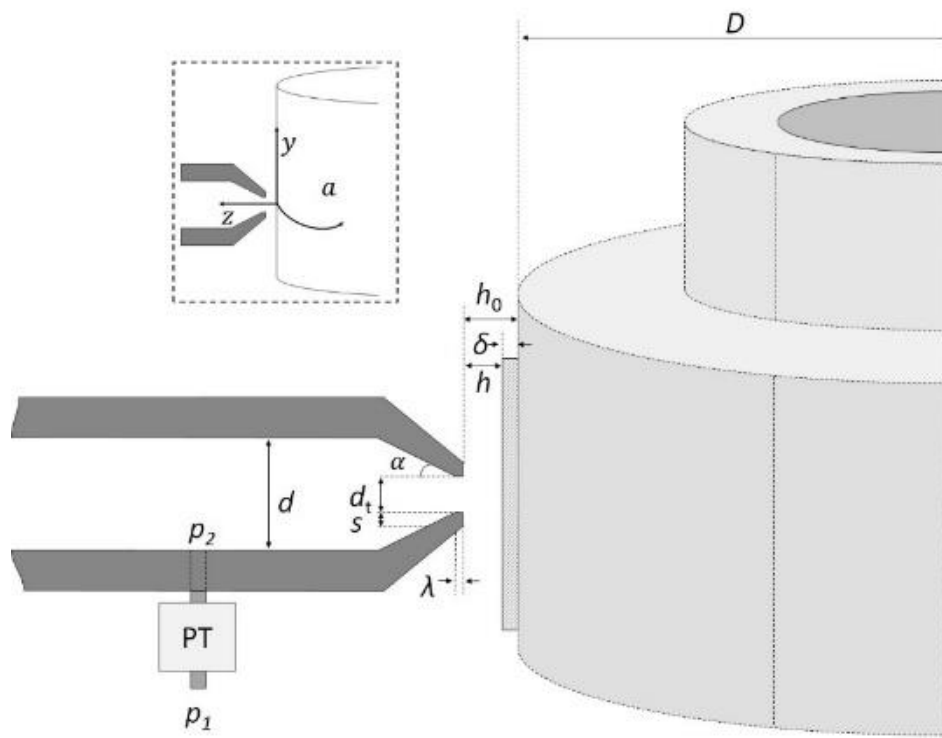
Detailed schematic of the gauging nozzle.
